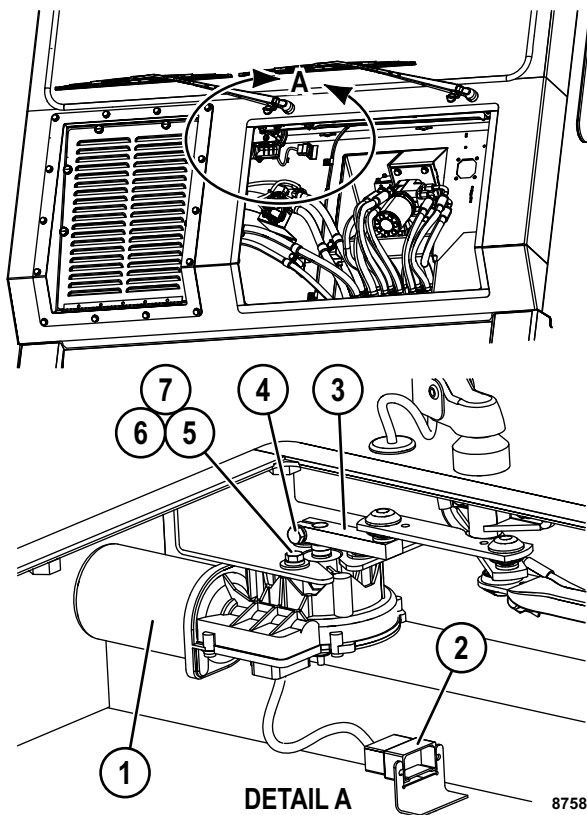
WIPER MOTOR REMOVAL & INSTALLATION
